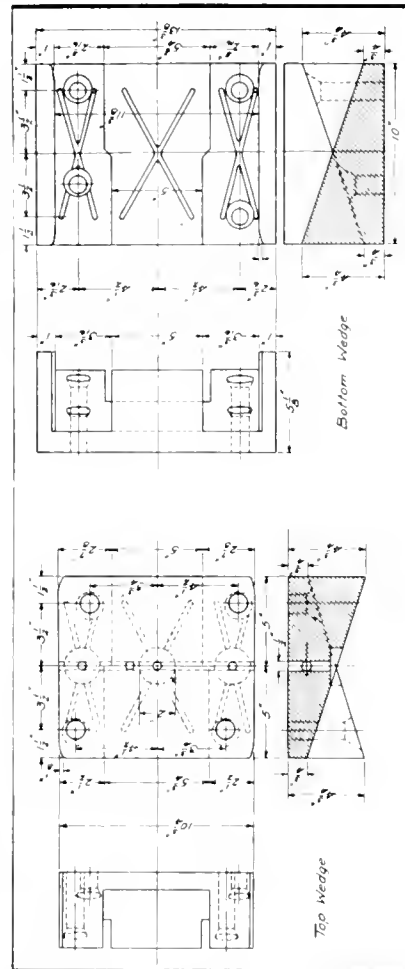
Detail of Front Truck Wedges, Mikado Locomotives, C.P.R.
